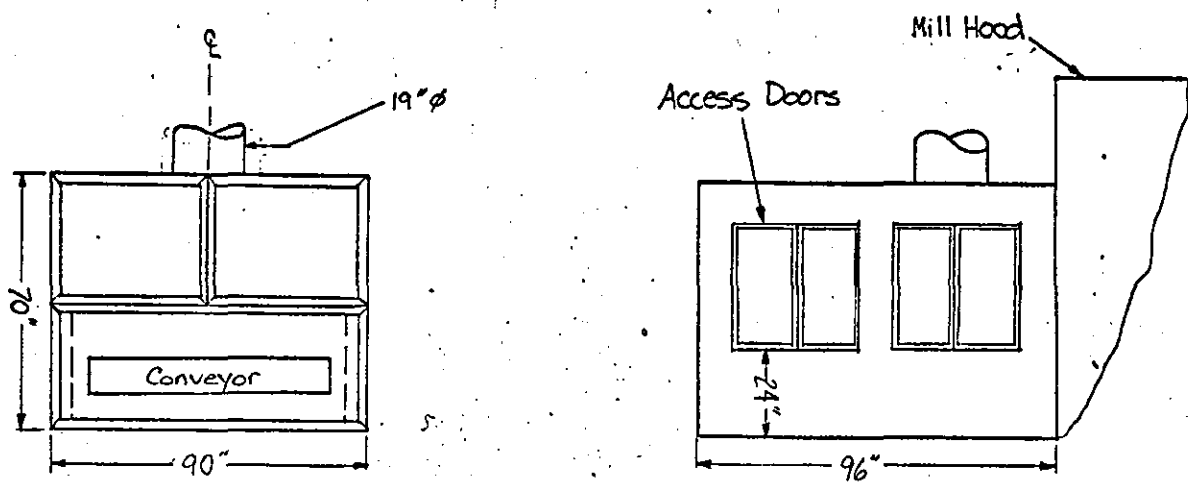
Mill line mill batch off conveyor and dip tank hood.
